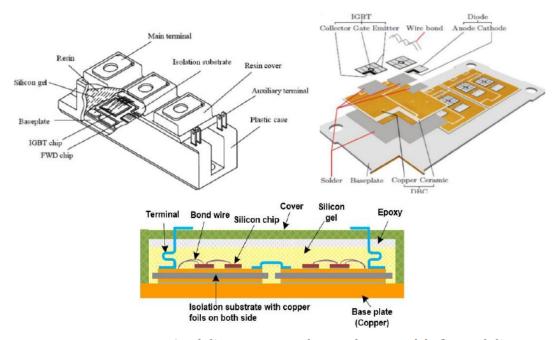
A 3-D view (top-left), cross section of a typical IGBT module (bottom-left) and IGBT layers (top-right) [24]
